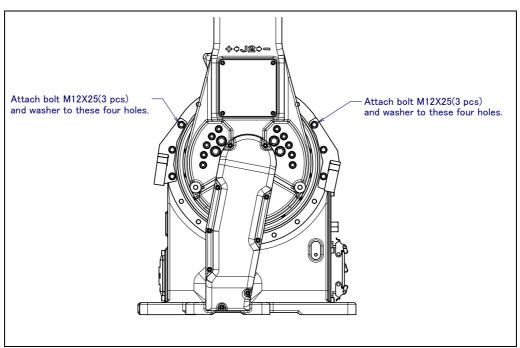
(a) J2-Axis movable mechanical stopper
